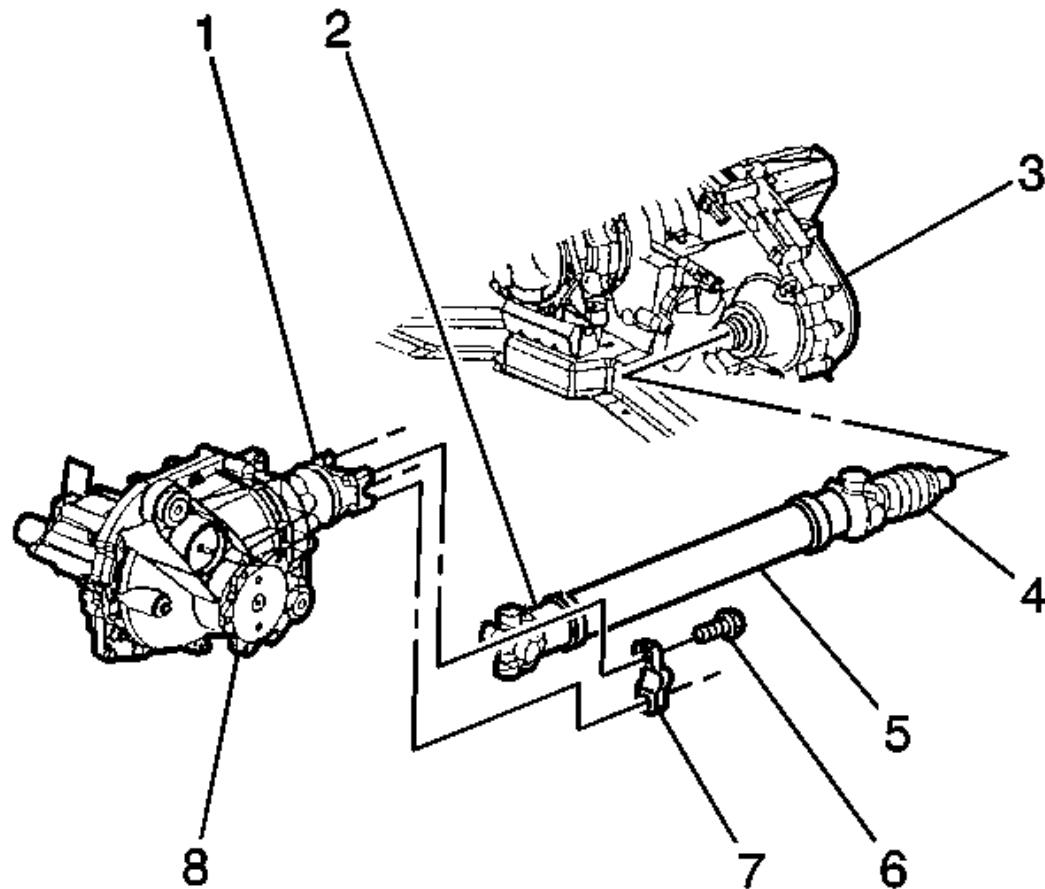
Front Axle Pinion Yoke, Propeller Shaft Universal Joint, Yoke Retainer & Bolts
